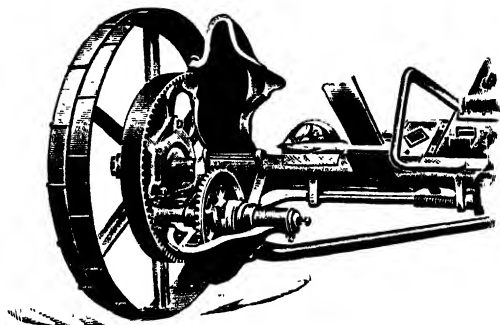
Driving gears of a Walter A. Wood mower. Internal driving gear ring type
